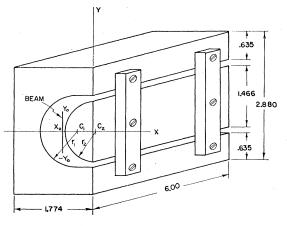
Oblique projection of deflecting field. (Dimensions in cm.)
